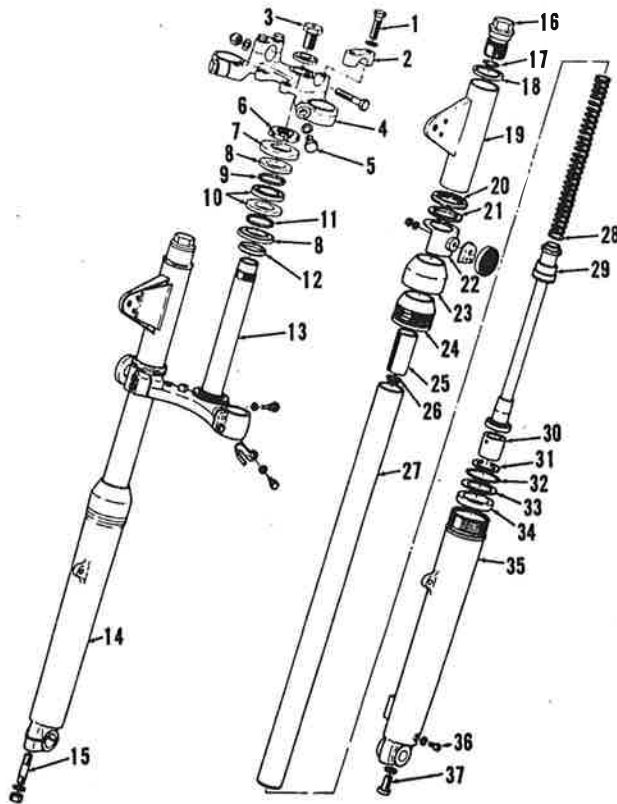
Exploded view of typical front suspension unit. Bearing balls (11) in lower race are larger than balls (9) in top race.
